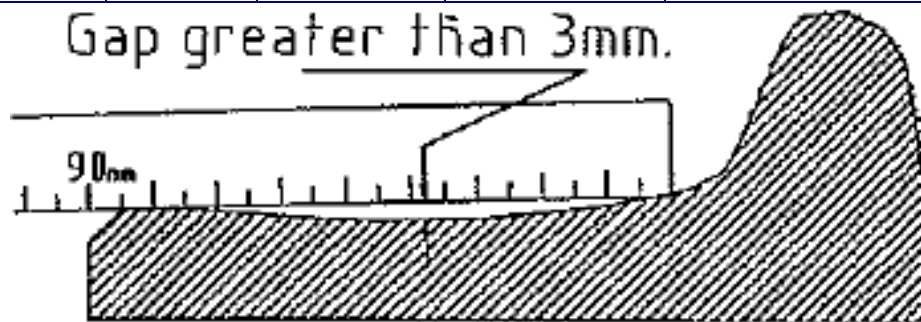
Maximum tread hollowing (Diagram – illustrative purpose only)
